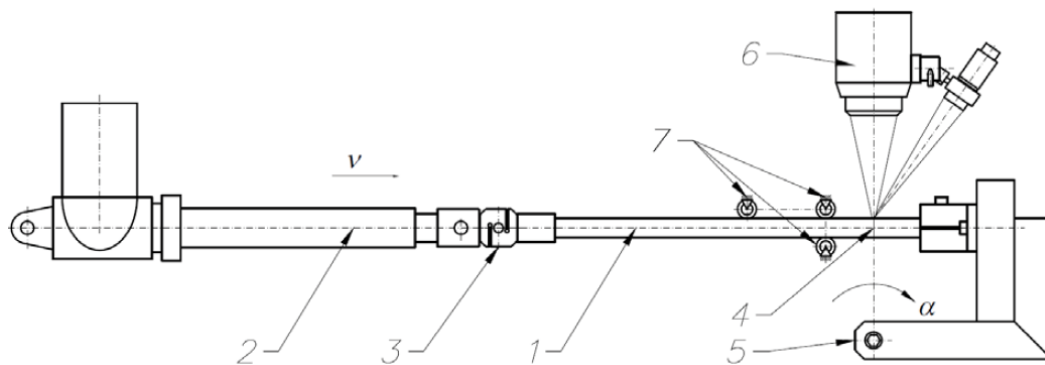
A scheme of the experimental setup for the laser-assisted tube bending process. 1 – tube, 2 – actuator, 3 – force sensor, 4 – plane of bending, 5 – bending arm, 6 – laser head, 7 - roller with horizontal axis
